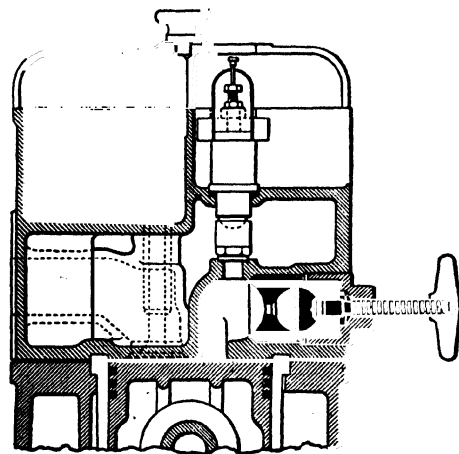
Section through the cylinder head, showing the combustion chamber with air cell and valve used when starting.
